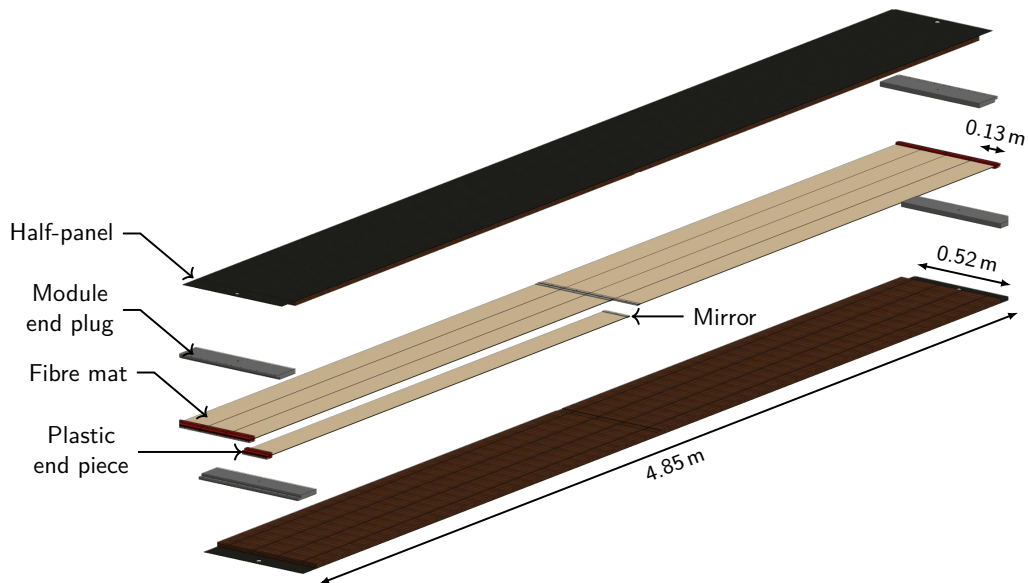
Exploded view of one fibre module of the SciFi Tracker showing the eight fibres mats, two half-panels, and aluminium end plugs. Adapted from Reference [57].
